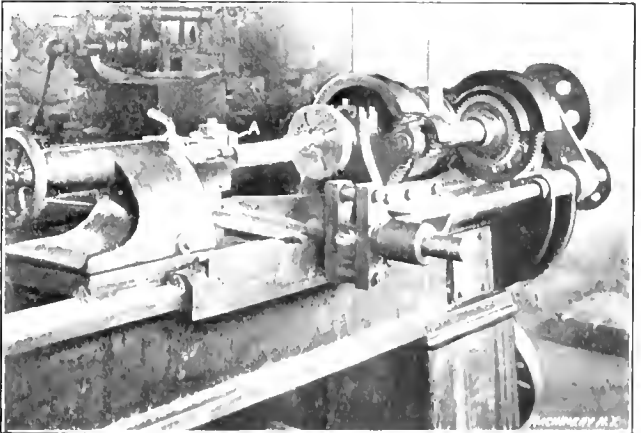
Lathe with Special Eccentric Turning Attachment and Tool
